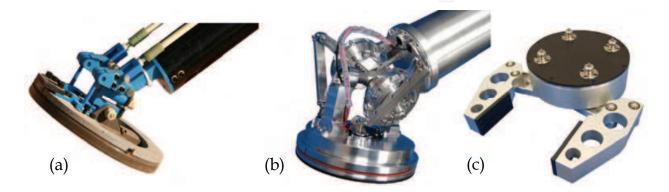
Metal-free wrist mechanism with metal detector (a), heavy payload wrist mechanism with tool-changer (b), gripper compatible with tool-changer (c)
